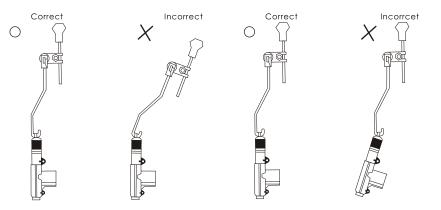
ASSEMBLING & INSTALLATION OF ROD
